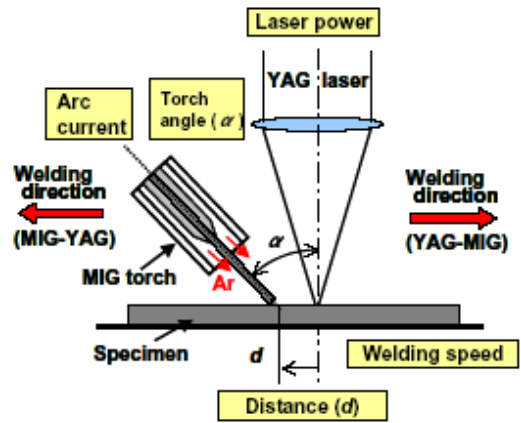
Schematic experimental setup for YAG laser and MIG arc hybrid welding.
